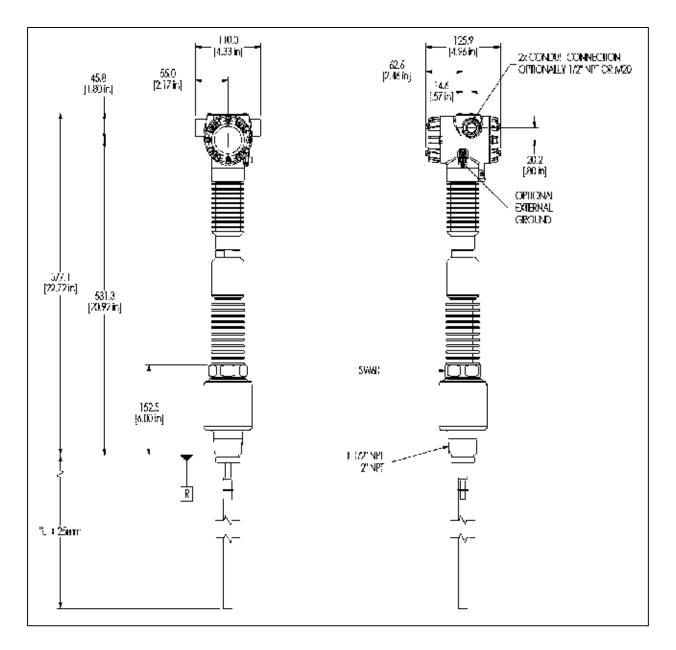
SLG726 Threaded NPT Mount Transmitter
